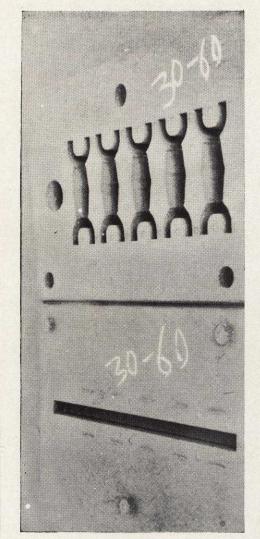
Shell Mould Showing Cope and Drag Made for Magnet Casting
